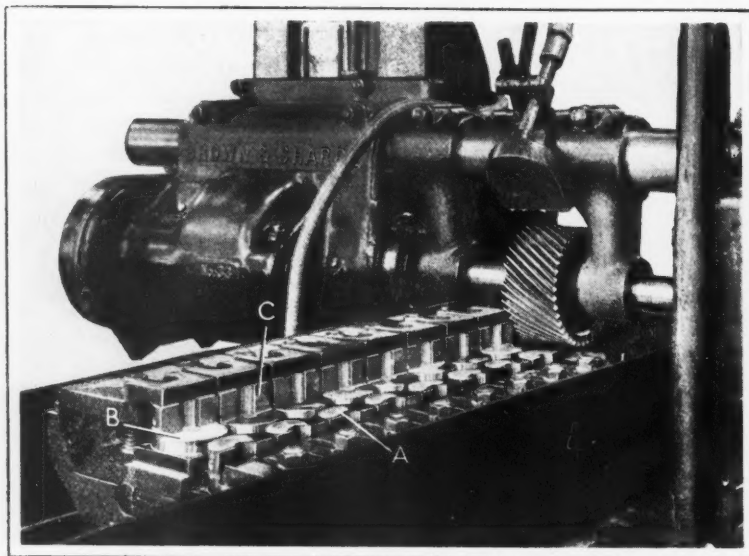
Milling Operation in which Two Surfaces of a Part are Milled to Height within a Tolerance of 0.001 Inch
